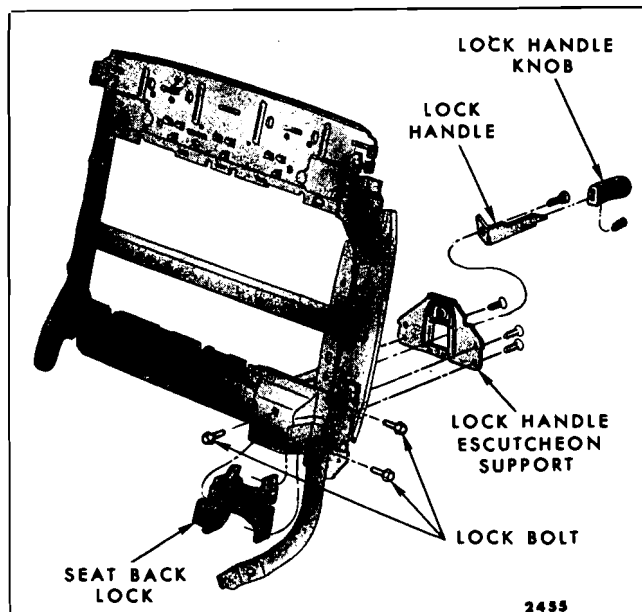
Front Seat Back Lock "A, B & X" Two-Door Styles, Standard Full Width Seat
